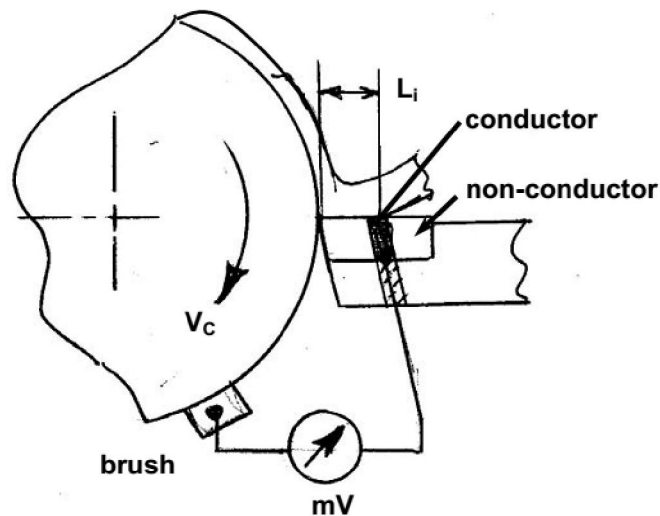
Compound rake used for measuring cutting temperature along rake surface
